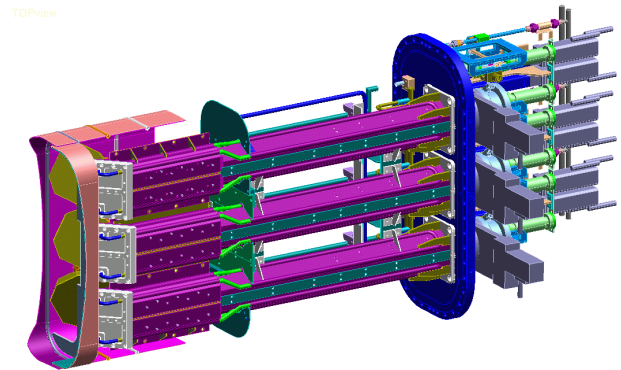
CAD drawing of the ECRH plug-in launcher with 3 beam lines
